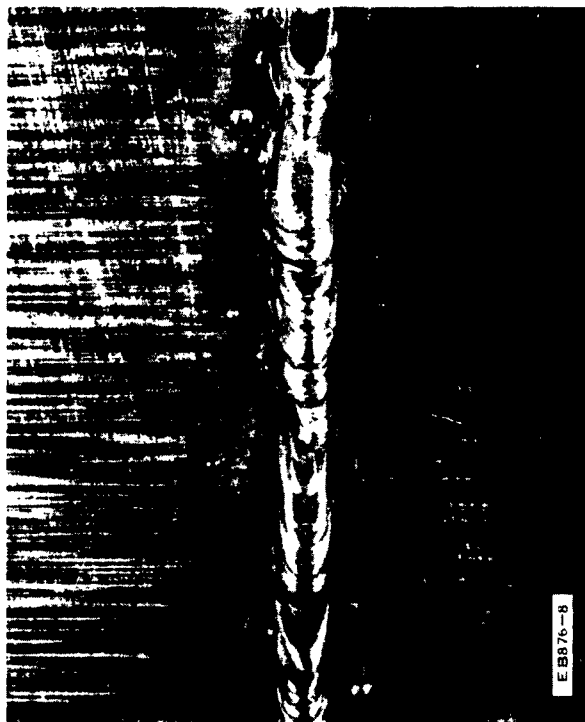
Final Weld Bottom Bead; X10; 0.290-Inch D6AC; Welded in the Annealed Condition and Heat Treated After Welding
